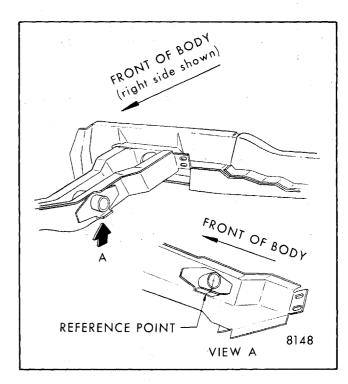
Side Rail at Rear Spring Rear Shackle Bushing - X Styles
